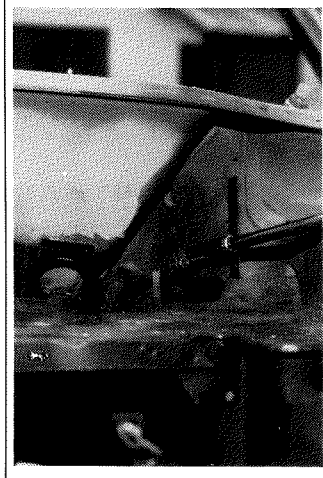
To remove the heater unit move to the bulkhead front and undo the bolts situated either side of inlet box, the air inlet box drain flap has also been removed prior to this, it is held by the oblong slot you can see on the inlet box.
